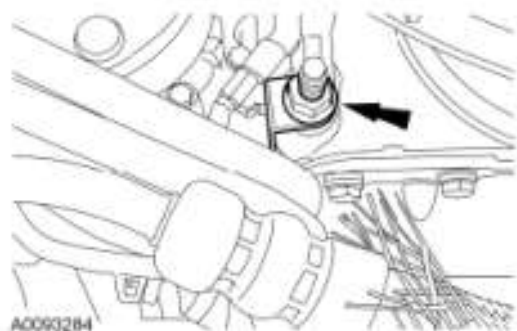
Identifying Flexplate Inspection Cover Bolts
